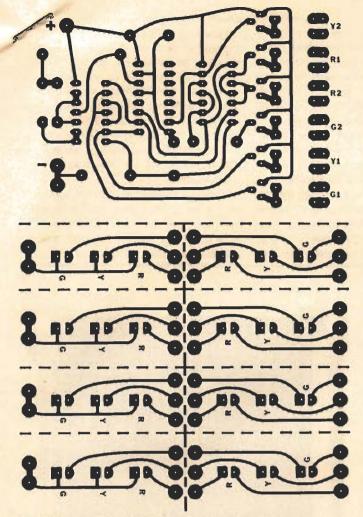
Actual-size foil pattern (above) and component layout (right). Board is divided into nine sections.
